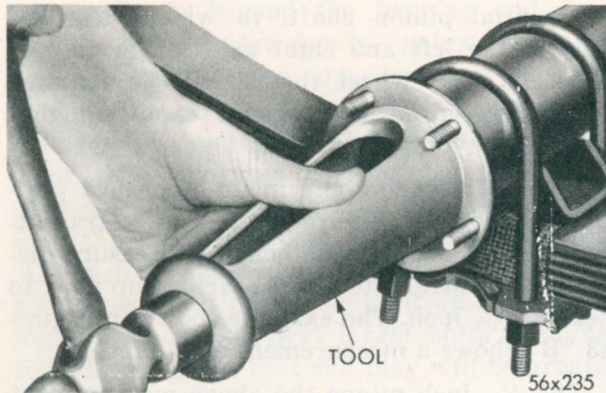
Installing Axle Drive Shaft Bearing Cup with Tool C-413
